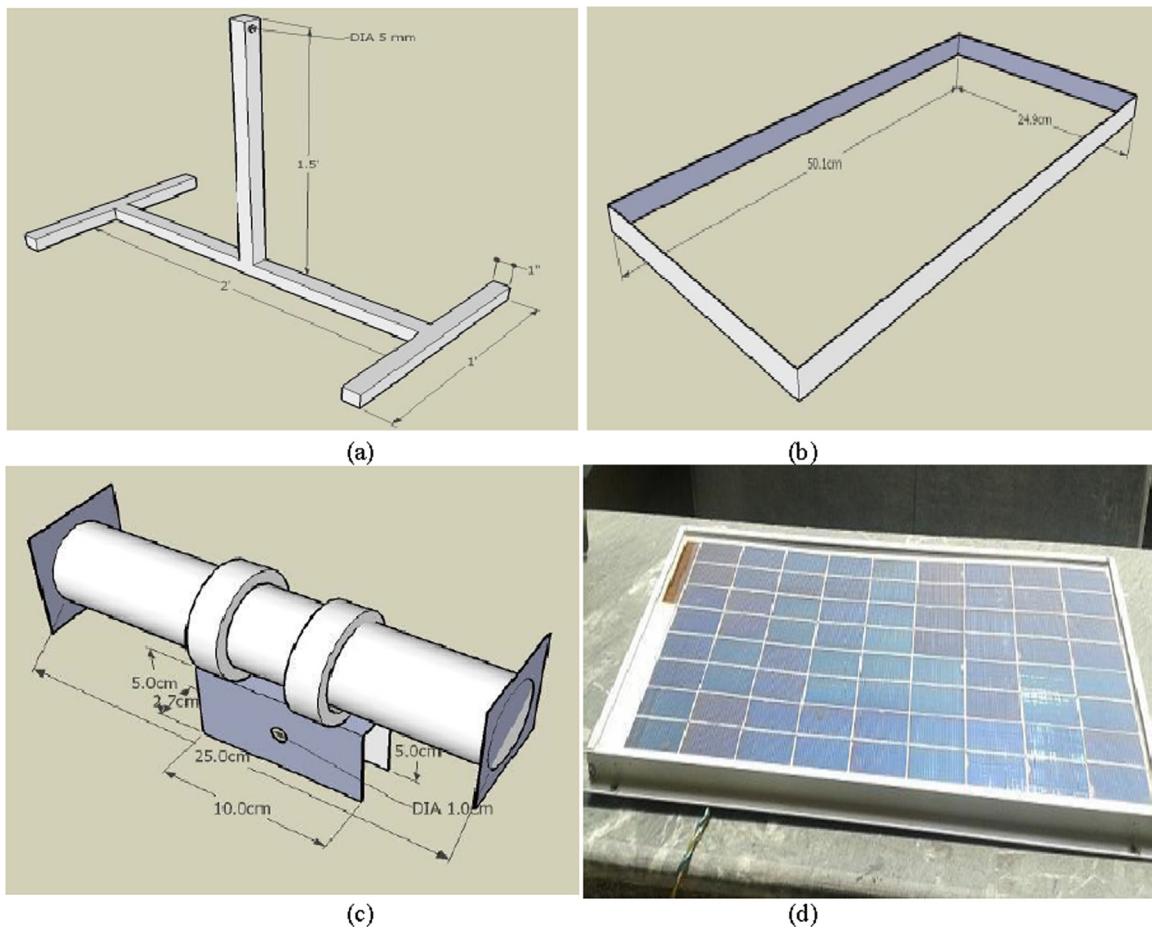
Components of the solar tracker: (a) Base, (b) Frame, (c) Shafting and Bearings, (d) Solar Panel [14].
